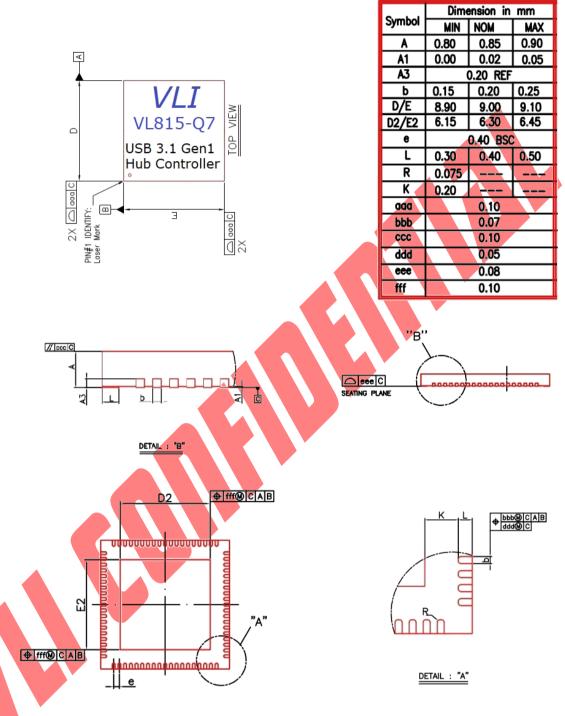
Mechanical Specification - QFN 76L 9x9x0.85 mm Package
